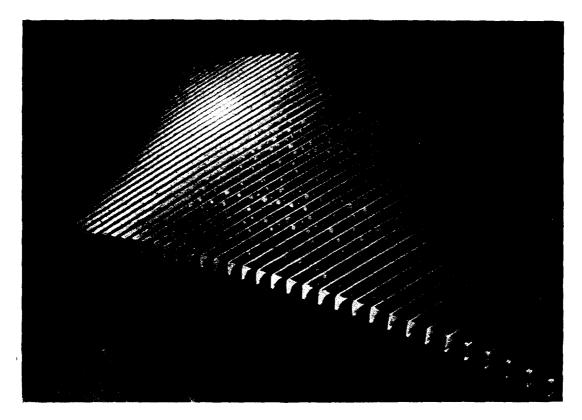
A.—H.M.S. Myngs—Main Gear Wheel before Shaving (surface marking on ahead tooth faces)
